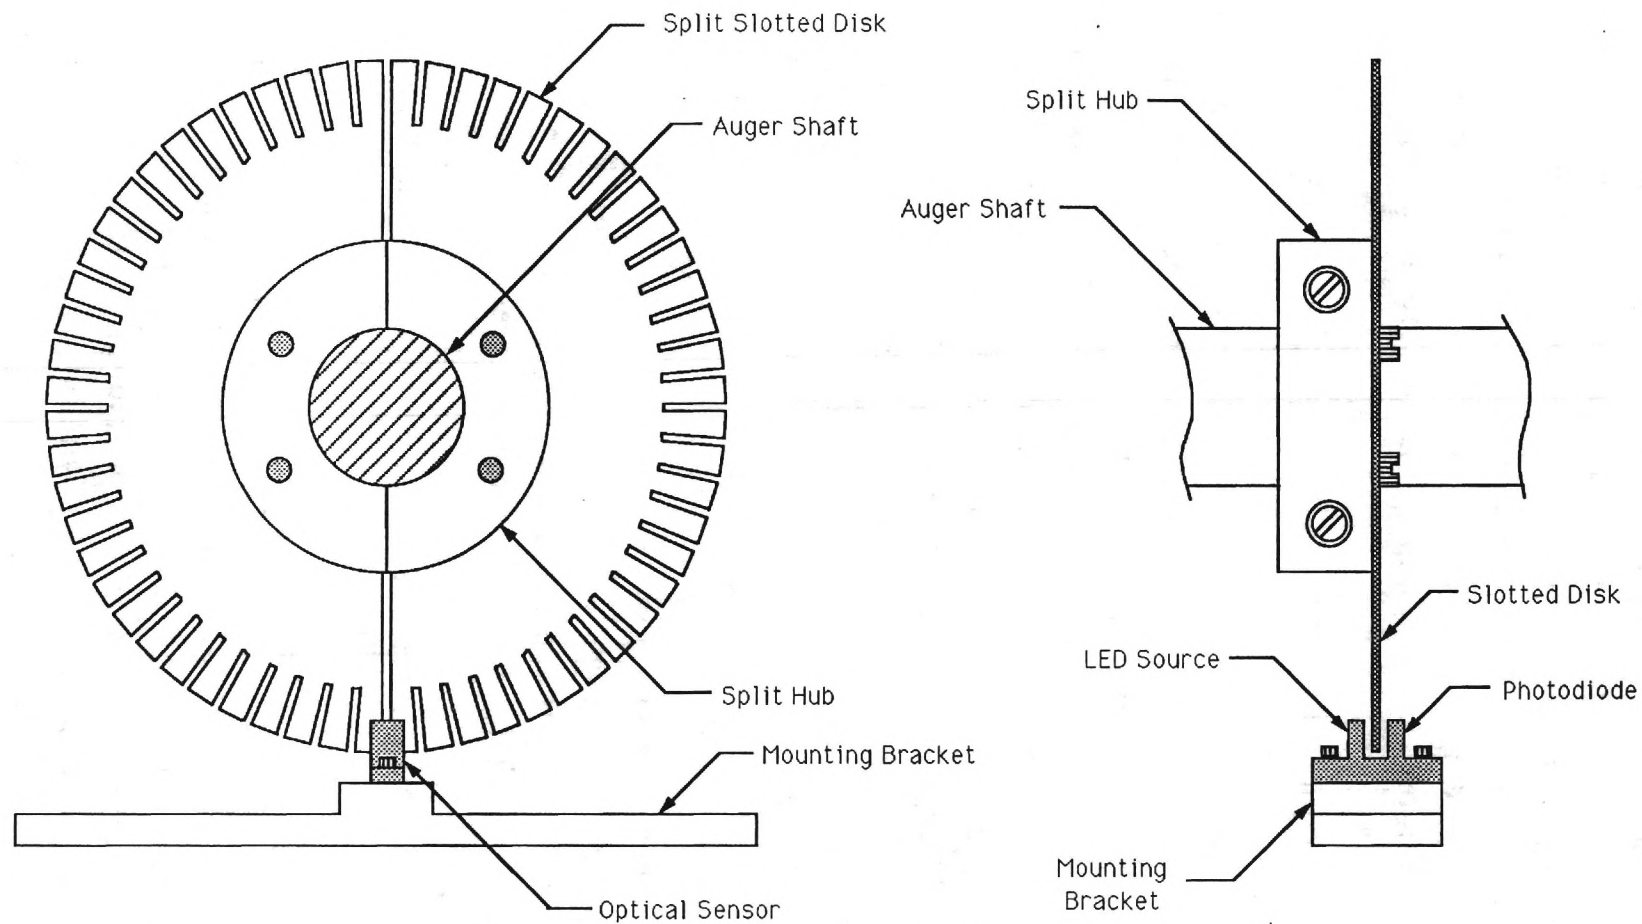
Opto-electronic Tachometer for Coal Feed Auger.
